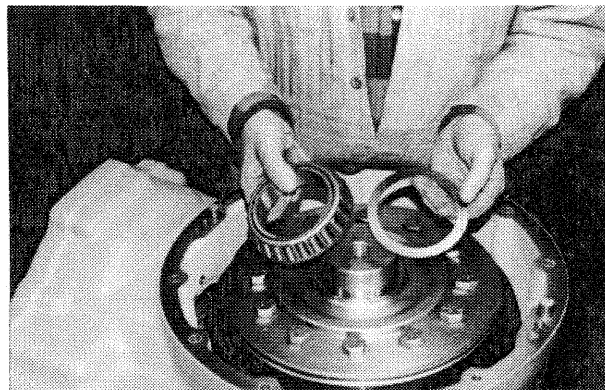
Removal of Drum & Shaft, and Ring Gear (1 of 4)
